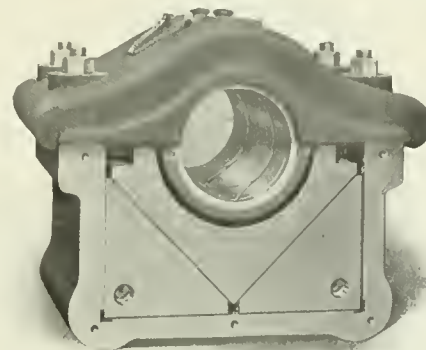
Adjustable Wedge Block Bearing for High-pressure Blower
